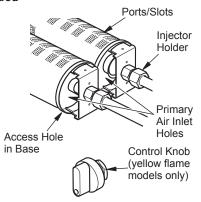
Injector Holder On Outlet Burner Tubes - Front and Middle Burners
